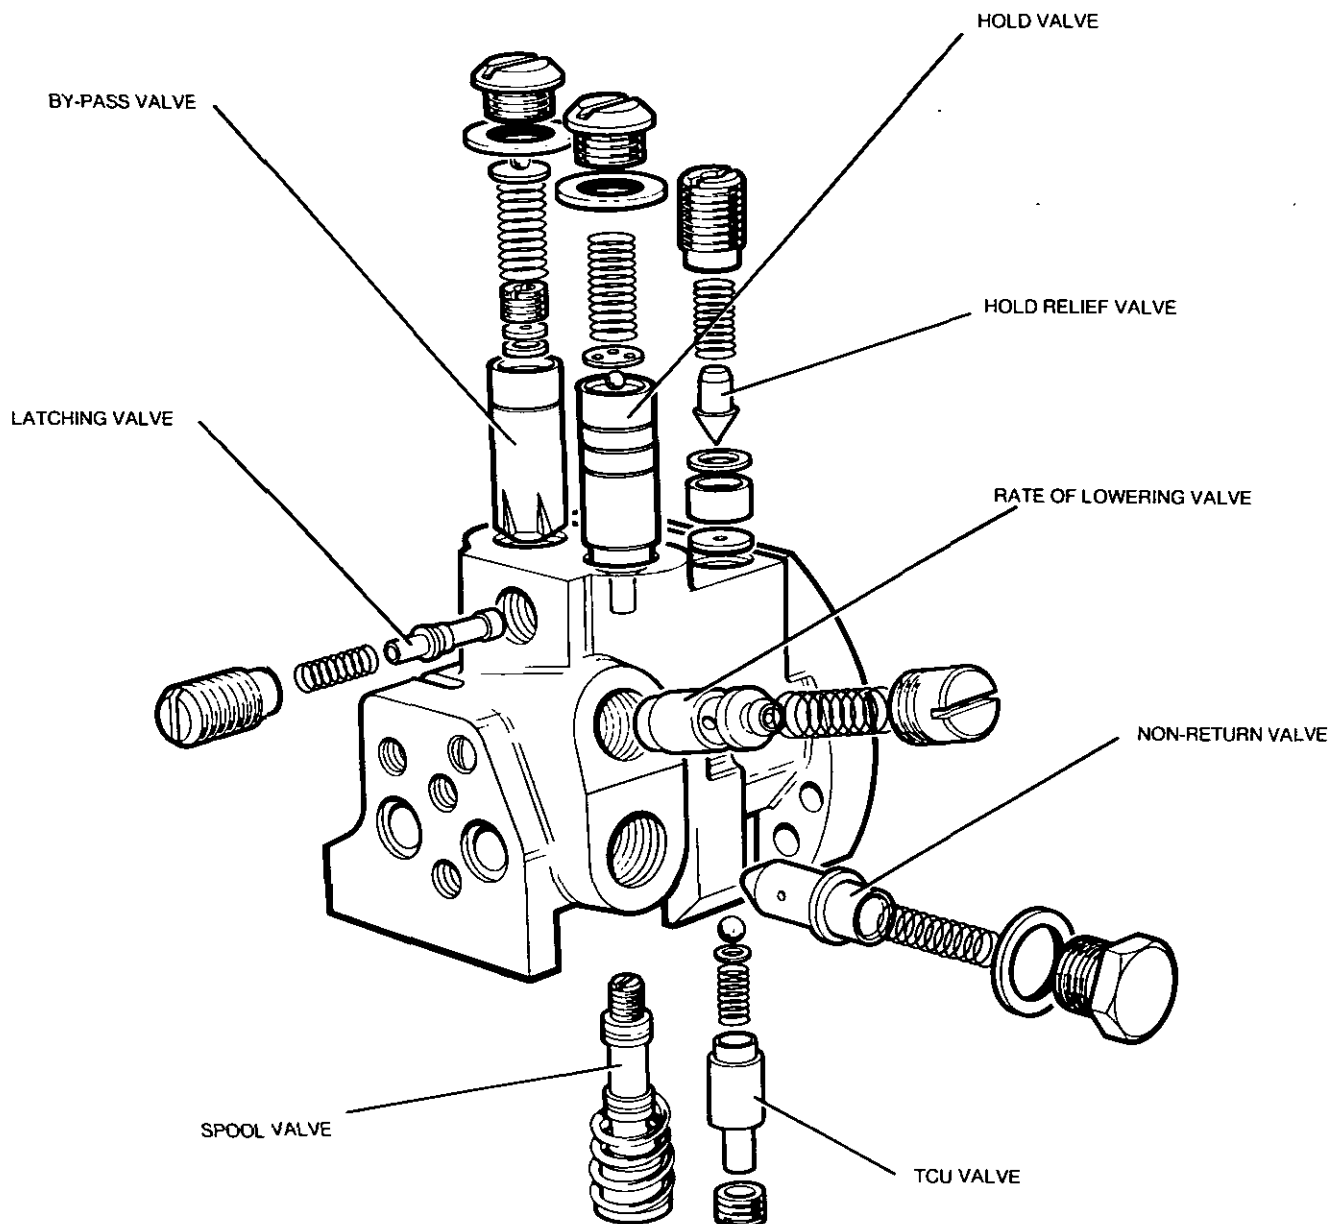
COMPONENTS OF SELECTAMATIC CONTROL VALVE
